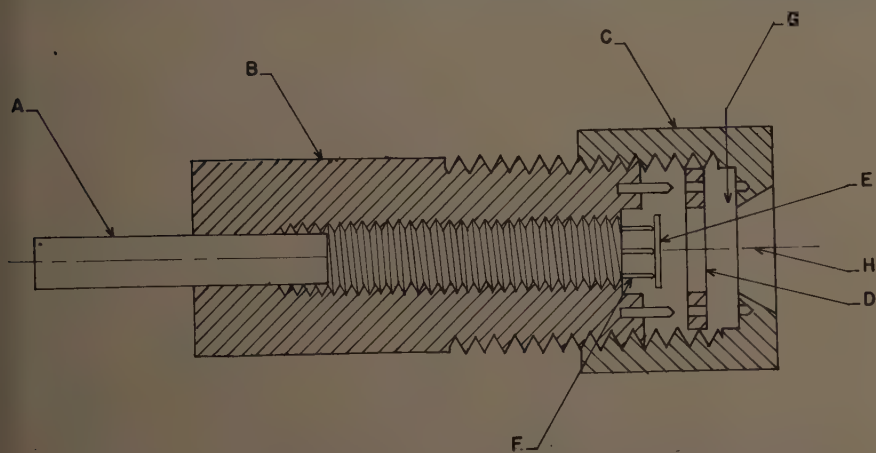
Cross-sectional view of calorimeter assembly: (A) threaded spindle; (B) brass cylinder; (C) threaded cap; (D) brass spacer (0.1 in.); (E) calorimeter button; (F) supporting needles; (G) sample location; and (H) aperture.
